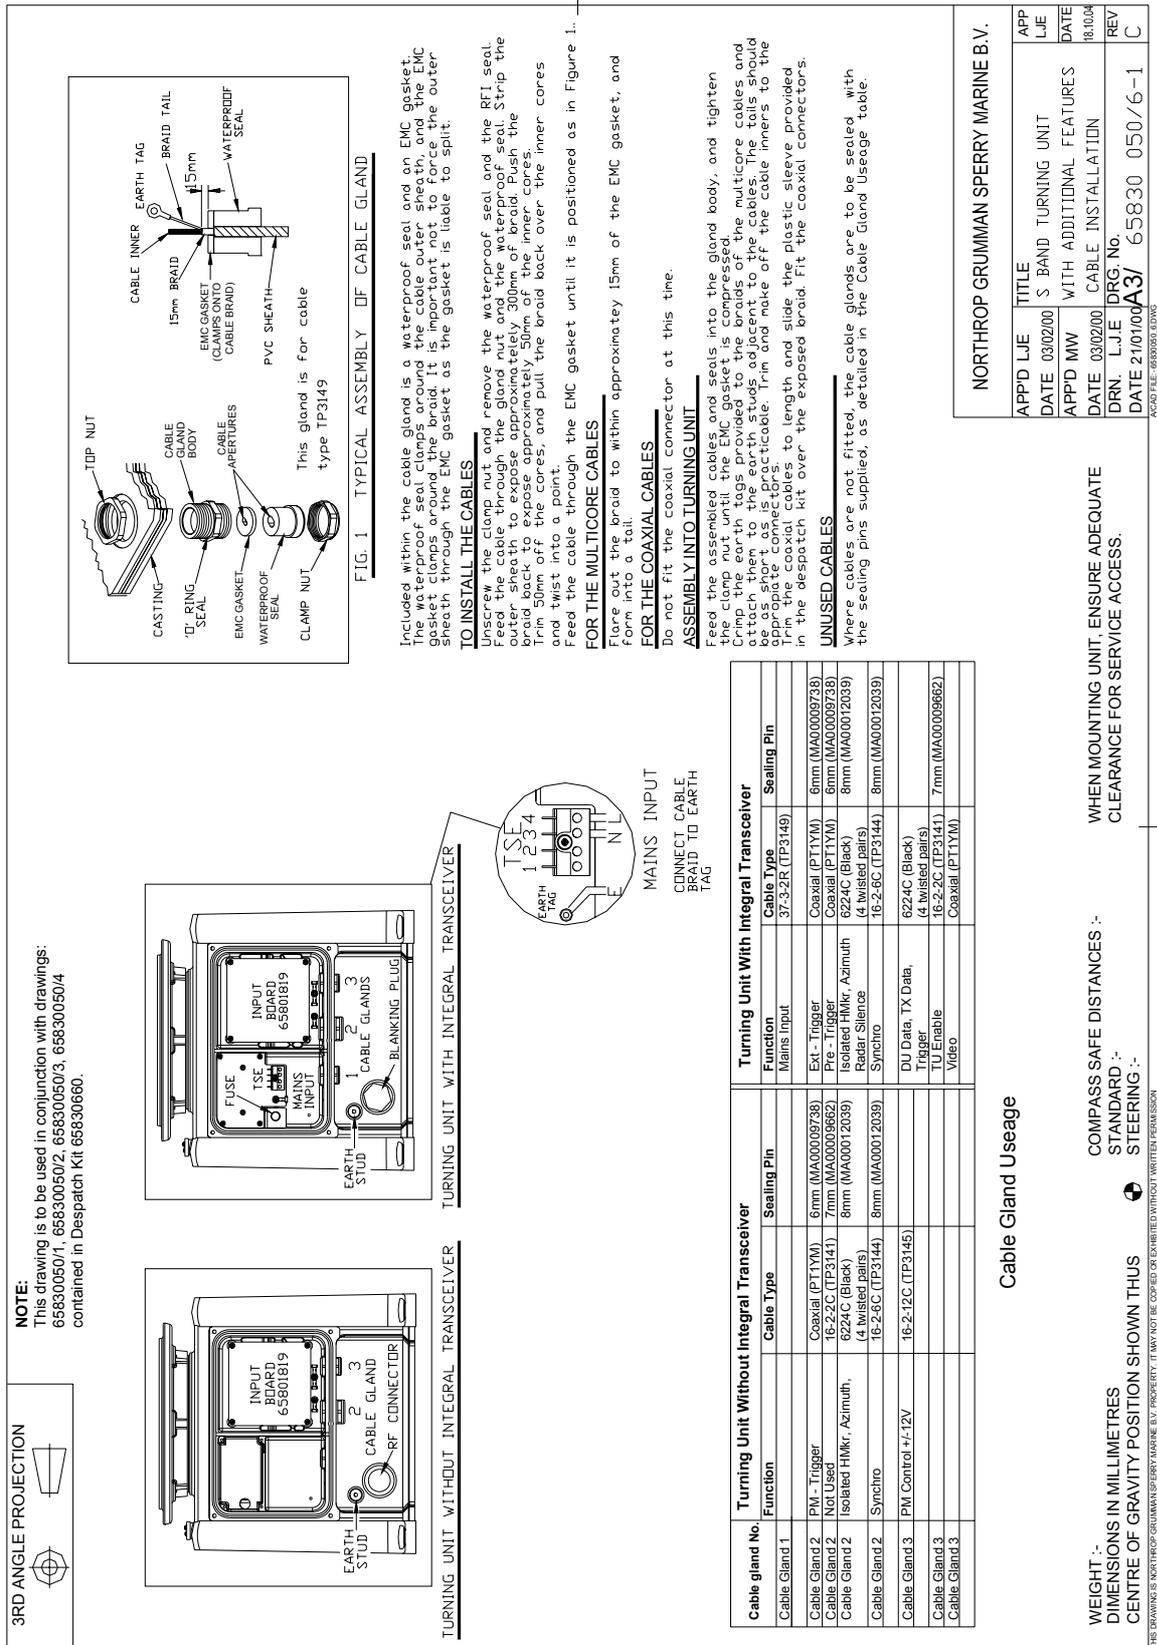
S-Band Turning Unit Cable Entry Installation Drawing
